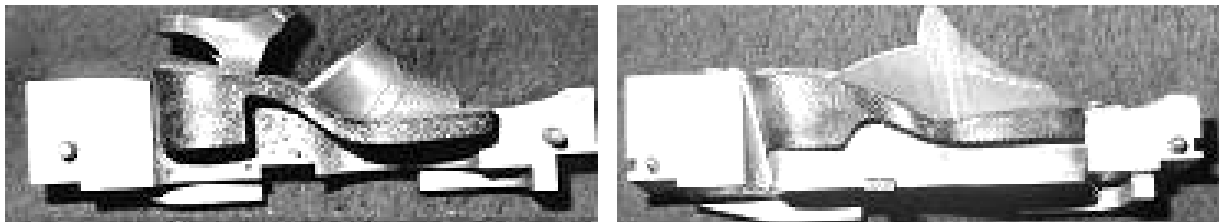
Modification of existing mould cavity by successive mechanical milling
